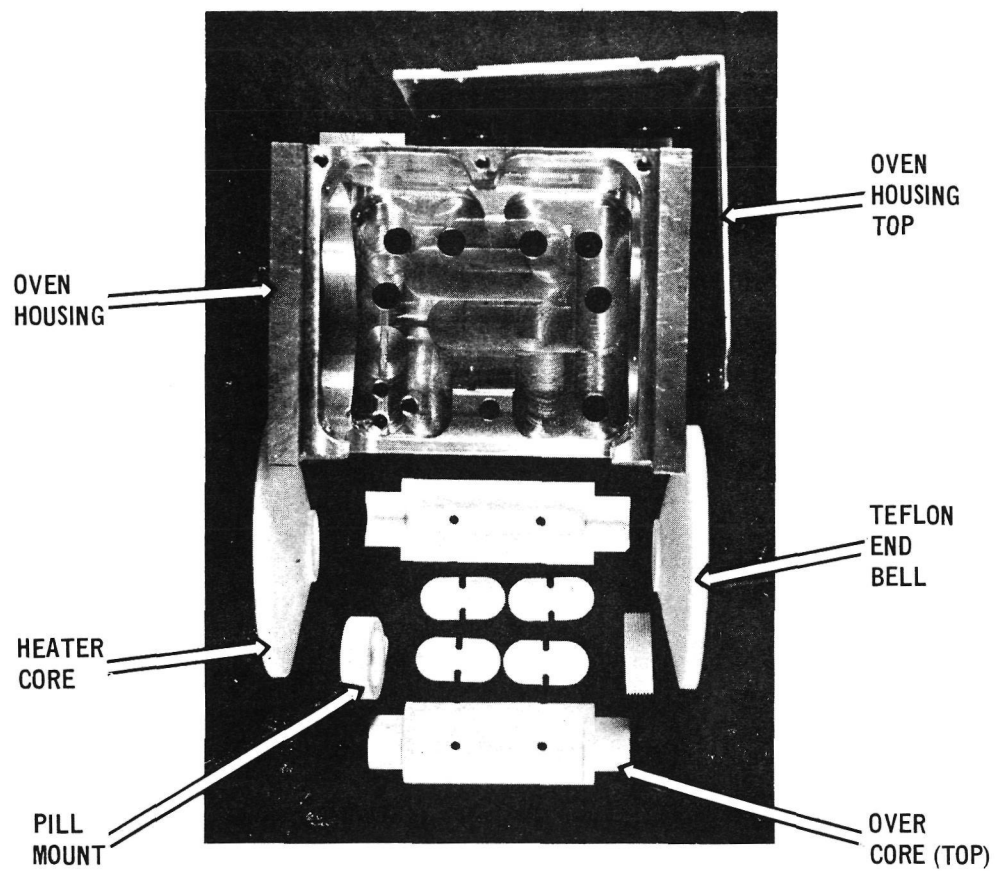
OVEN ASSEMBLY COMPONENTS FOR 1.06 μm MODULATOR
